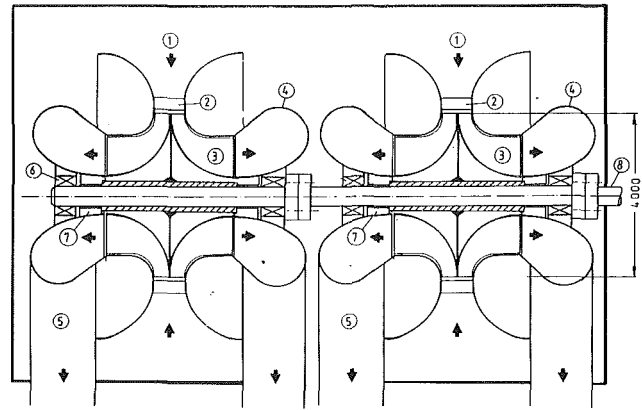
Two-stage double inflow radial steam turbine, dimensions in mm: 1 = inlet from evaporator, 2 = stator, 3 = rotor, 4 = exit diffuser, 5 = exit pipe, 6 = bearing, 7 = sealing, 8 = coupling; number of blades = 31
